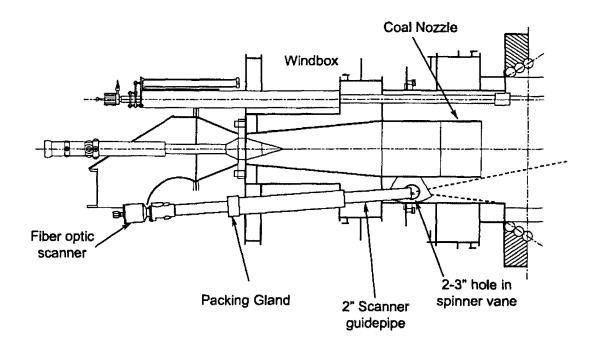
Typical Fiber Optic Scanner Installation - Wall Fired Burner
